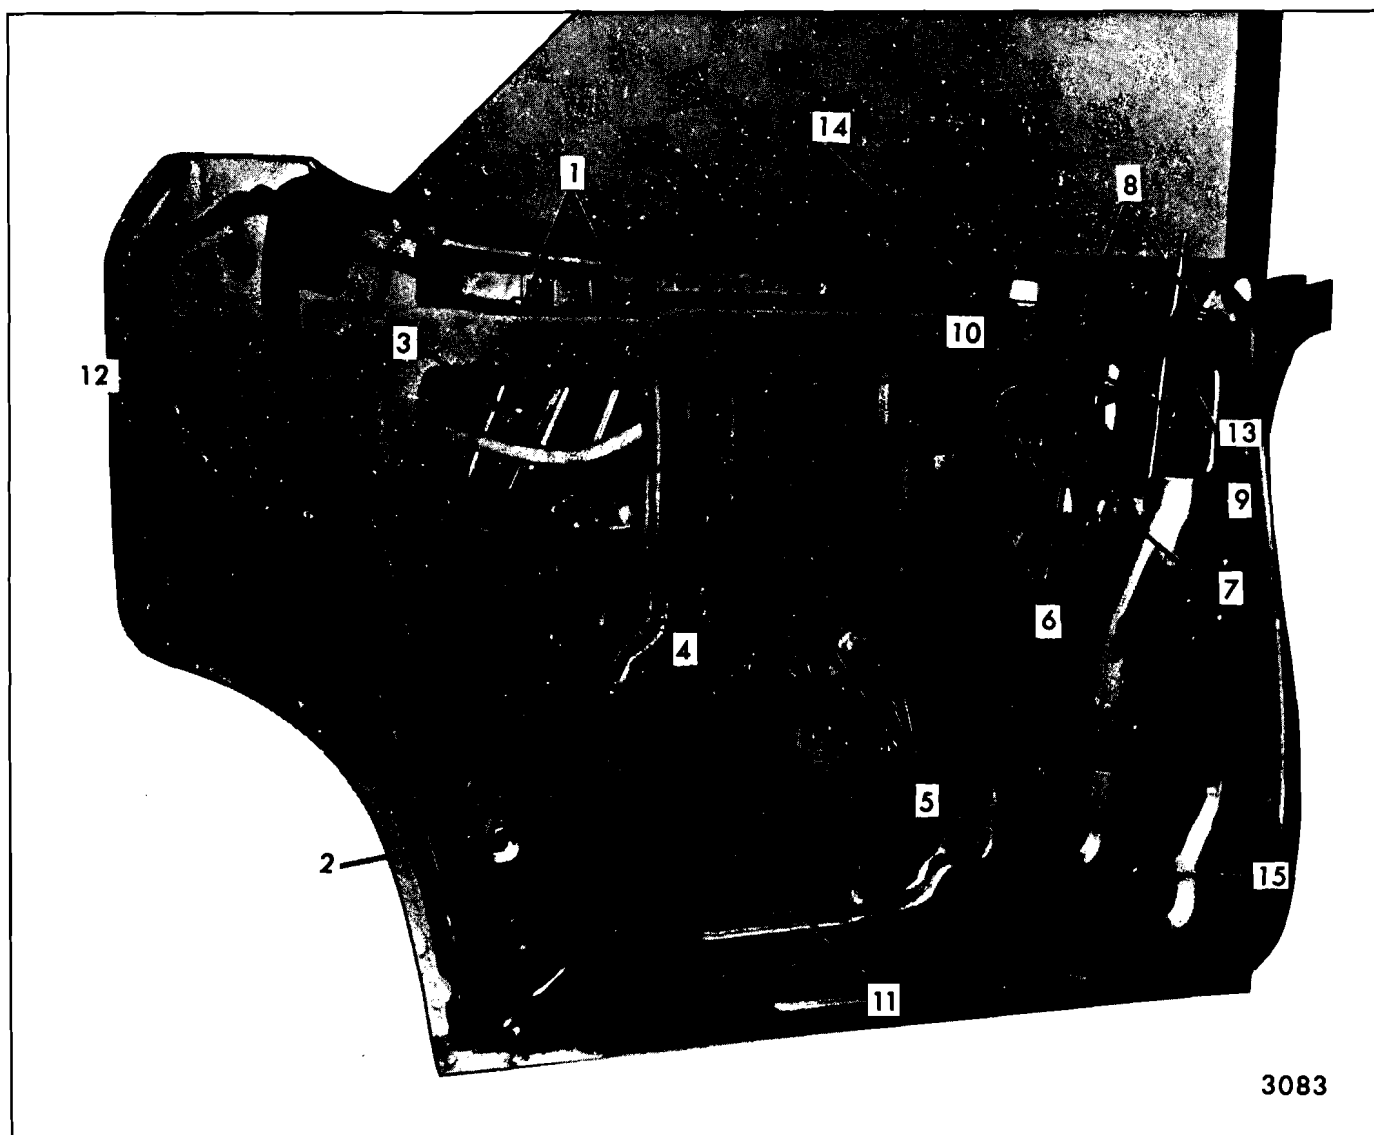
Rear Door Hardware - "B-39" and "C-39, 49 and 69" Styles
